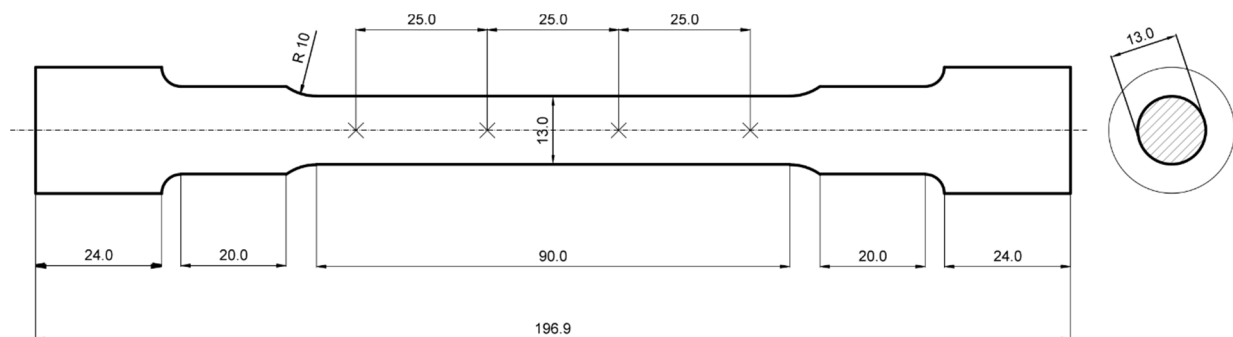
Cylindrical “dog-bone” steel specimen samples, dimensions in mm.
